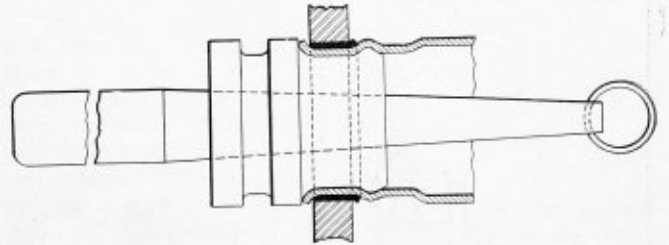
Lipped Sectional Expander Used to Expand the Firebox End of Tubes
